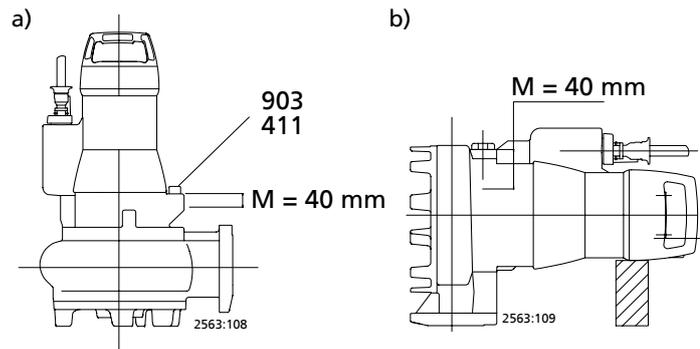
Filling in the lubricant level a) Versions YL & WL; b) Versions YL & WL for size 50-170, 50-172 and 65-220
